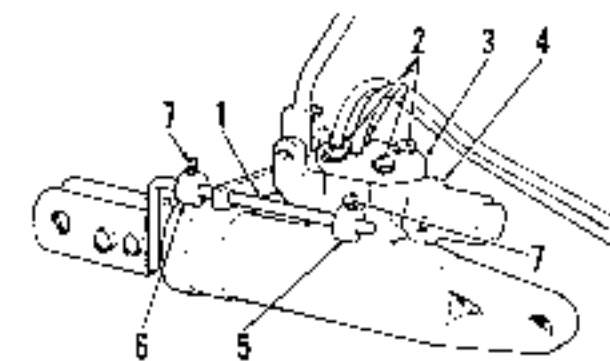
Pony hydraulic cylinder and control valve assembly.
